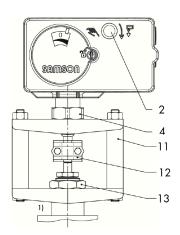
Form-fit attachment with stem connector, e.g. with yoke on the valve
